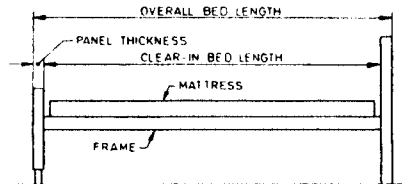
TYPICAL SKETCH OF A WOODEN BED
